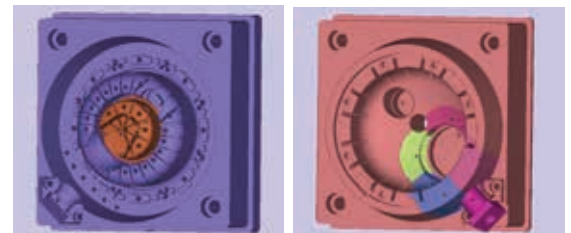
The mold design. The different colors depict the nine components that make up the mold assembly.
